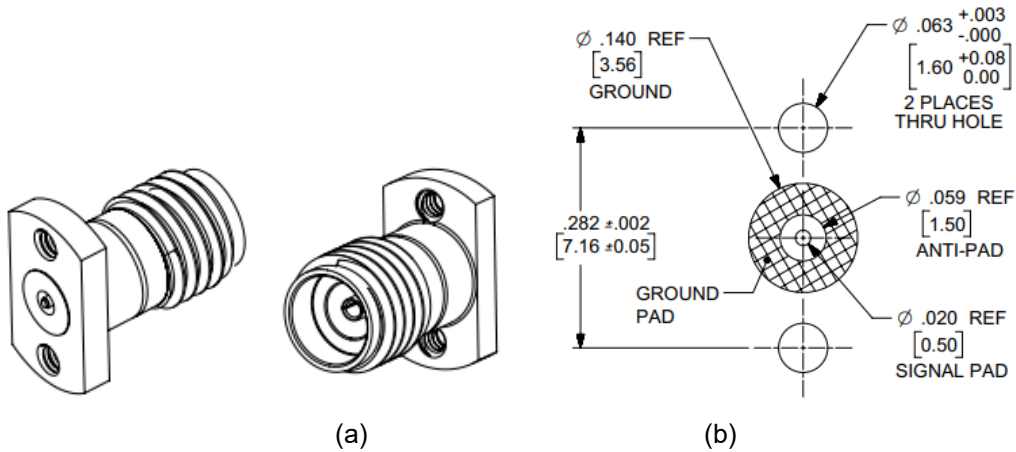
(a) 2.92mm connector (b) Recommended footprint of the 2.92mm connector
